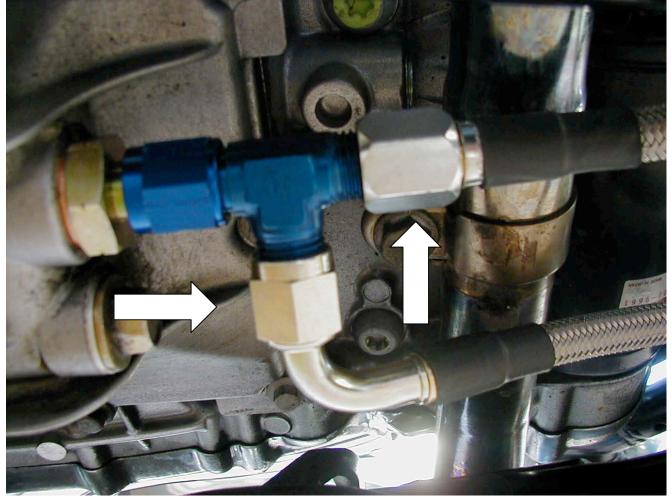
2002/2006 Bonneville America with BP Oil Cooler Kit Installed
